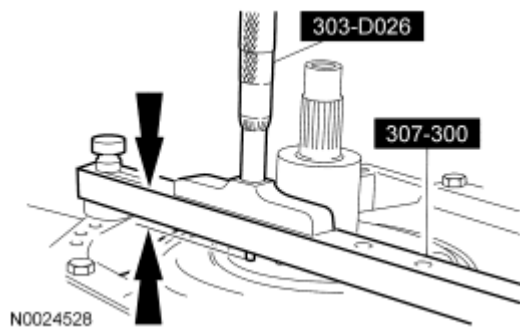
Measuring Distance From Top Of Special Tool To Face Of Reverse/Overdrive Ring Gear Assembly Surface Area
